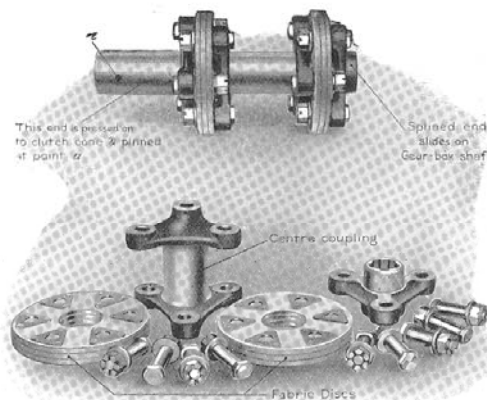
Fabric Disc Universal Joint, Assembled and Dismantled, as fitted between Clutch and Gearbox.
